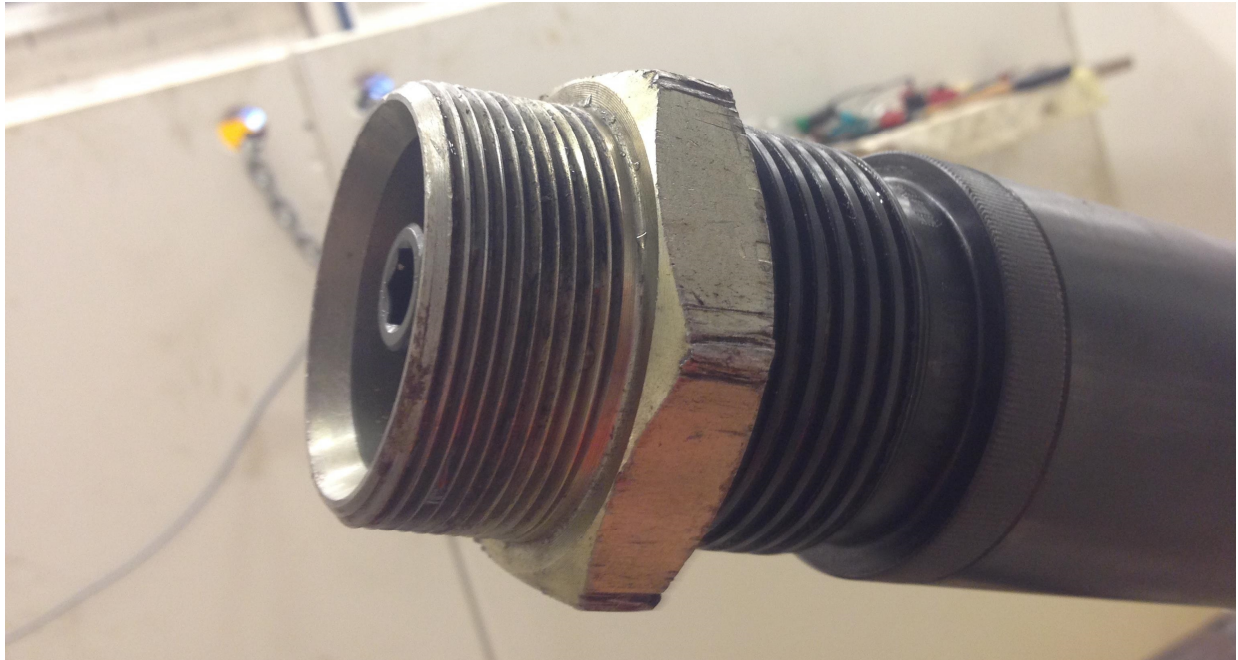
Shear screw with a reducer fitting connected to the sealing cap.
